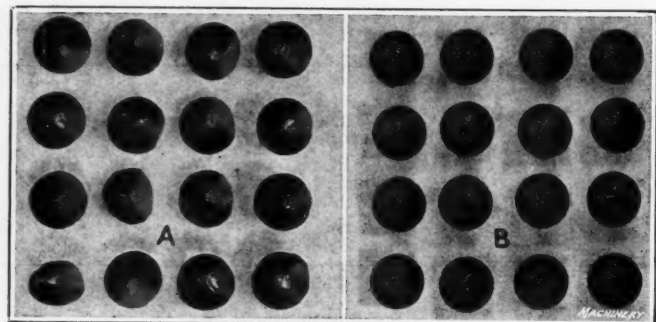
(A) Fractures of Balls shown at (B) in Fig. 35, showing Original Header Crack, Fire Crack and Fracture of Uncracked Metal; (B) Etched Balls, showing Crack from Pole to Pole and Crack on Equator
